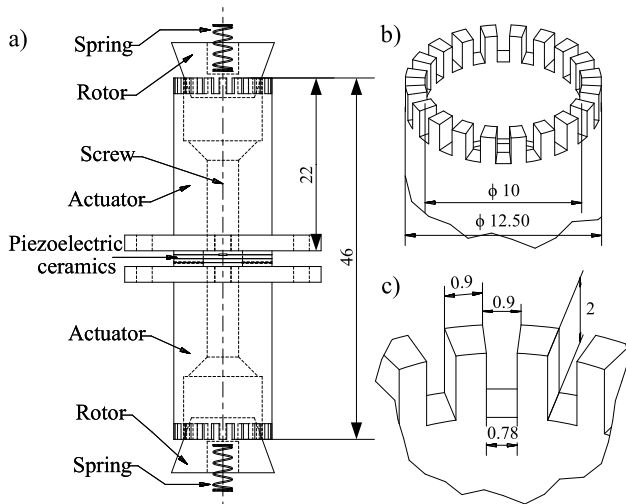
Single actuator structure: a) the cross-section of the single actuator, b) the isometric view of the actuator and rotor contact surface, c) the dimension of the teeth. All dimensions are in millimeters.
